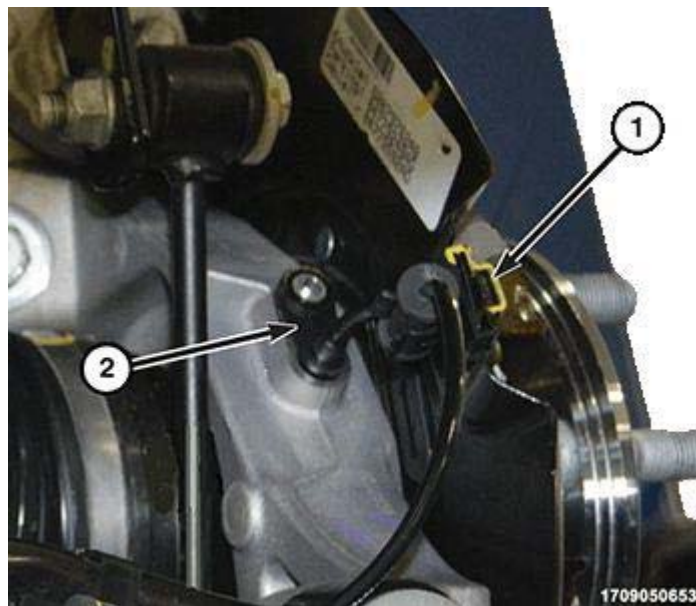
Wheel Speed Sensor Connector & Knuckle
